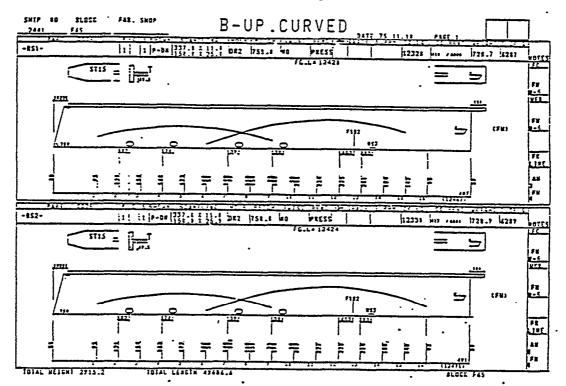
Part Dimension Plan of Curved Built-up Frame (by COM)
